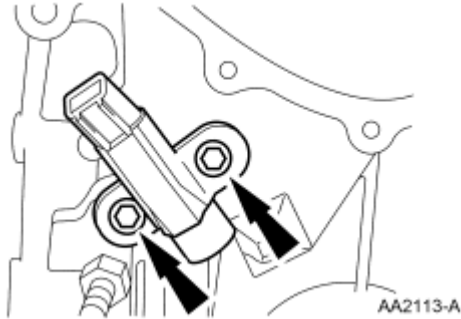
Locating Crankshaft Position (CKP) Sensor Bolt
